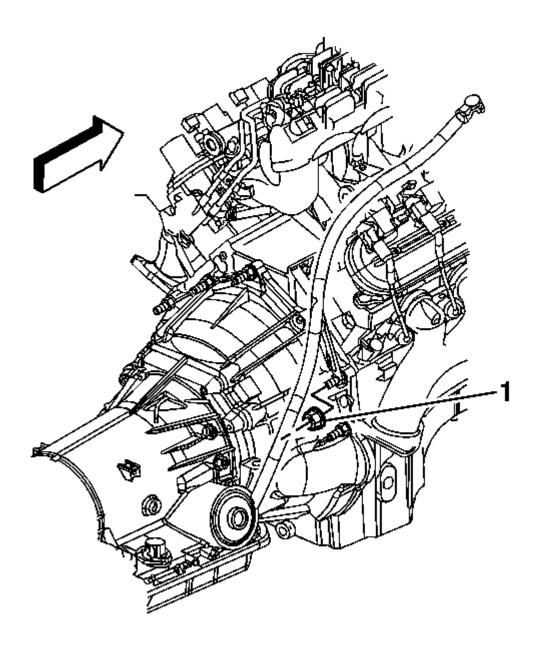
View Of Transmission Oil Level Indicator Tube Nut Courtesy of GENERAL MOTORS CORP.
